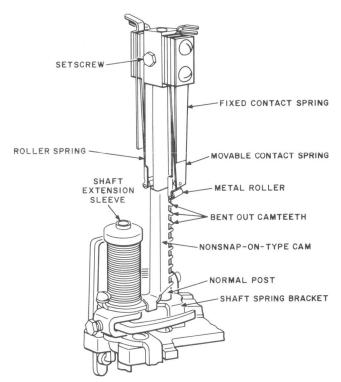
Normal Post Spring Assembly Having Metal Rollers Operated by Nonsnap-on-Type Cam
